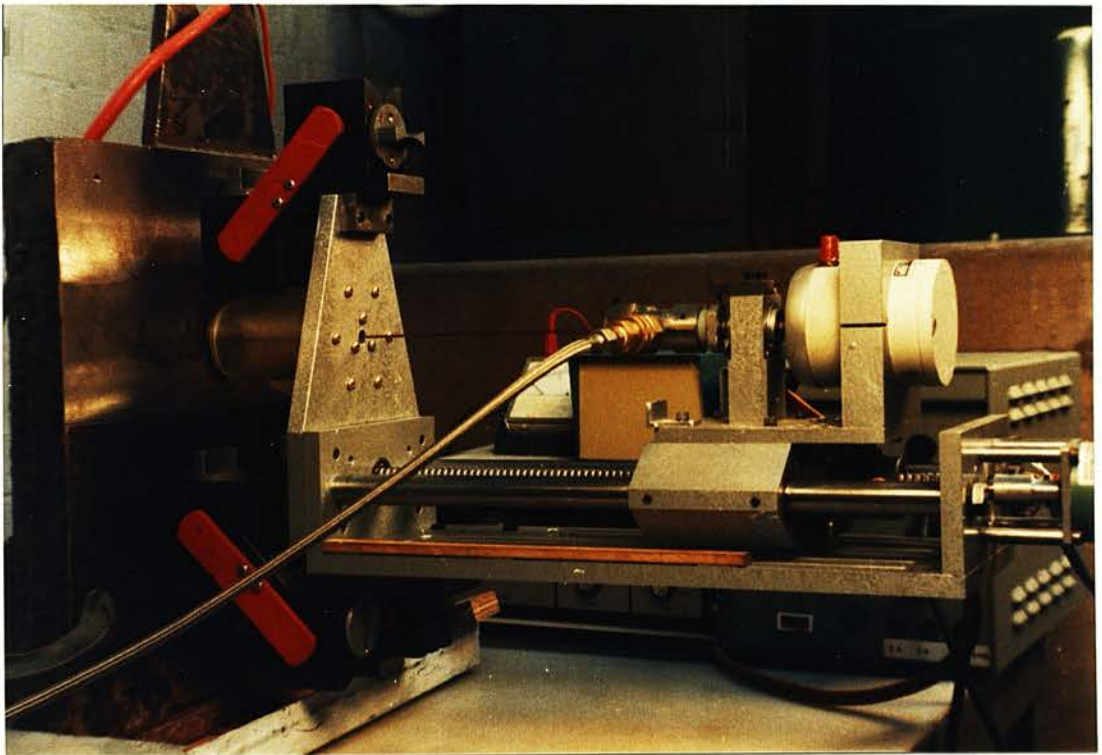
Drilling apparatus clamped to the workpiece
